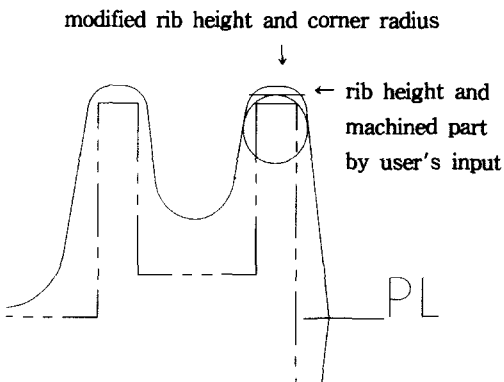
Dimension modifications for an overlap between corner radius and machined part
